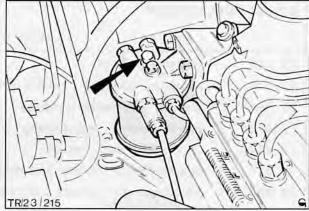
Fuel filter bleed bolt Air cleaner removed for clarity
